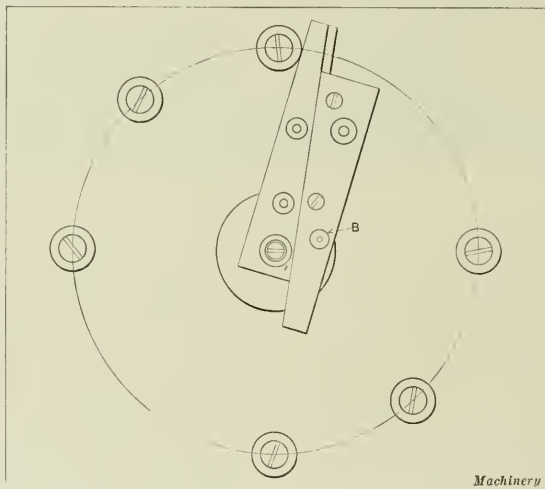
Use of Parallels for boring Holes in Gear Blanks
